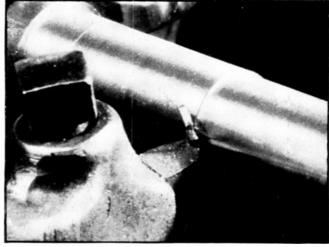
SIMILARLY, THIS ILLUSTRATION SHOWS THE SMOOTHER FINISHING CUT TAKE ON THE FREE MACHINING INVAR BAR
